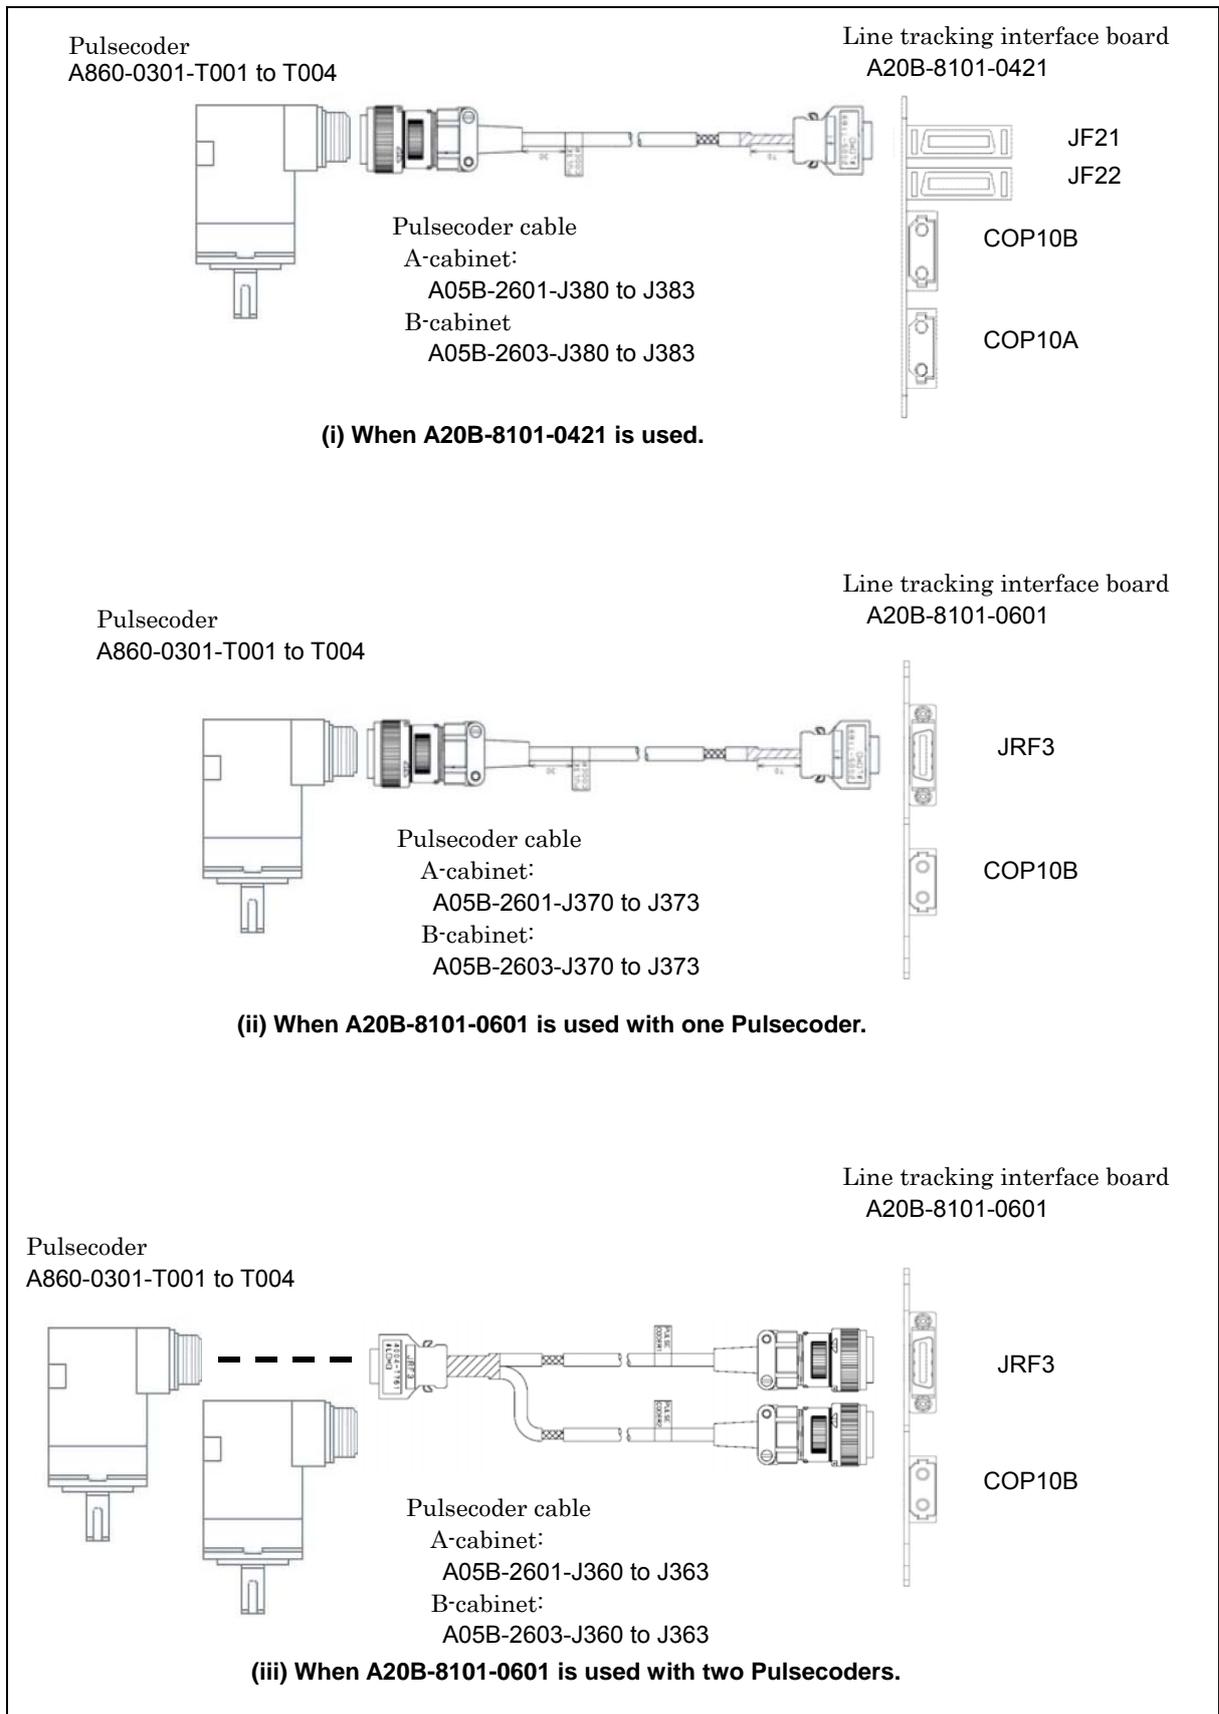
(a) Connecting cables (Pulsecoder, A860-0301-T001 to T004)
